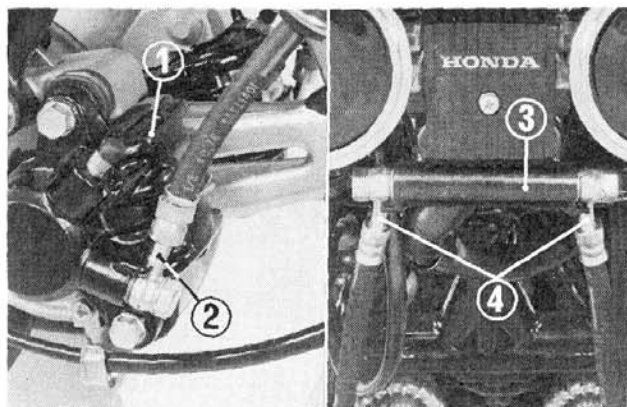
① Caliper ② Straight side ③ Three way joint ④ Bent side
